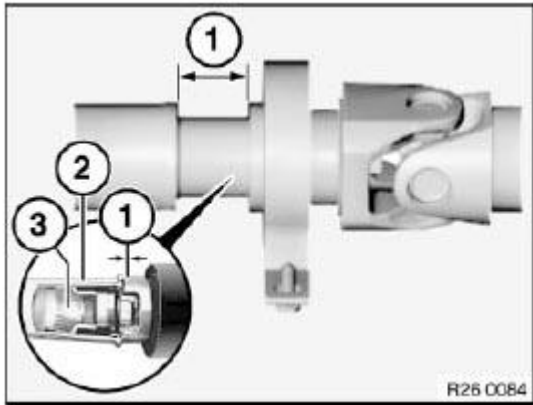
Identifying Propeller Shaft Aluminum Tubing And Bearing Journal
